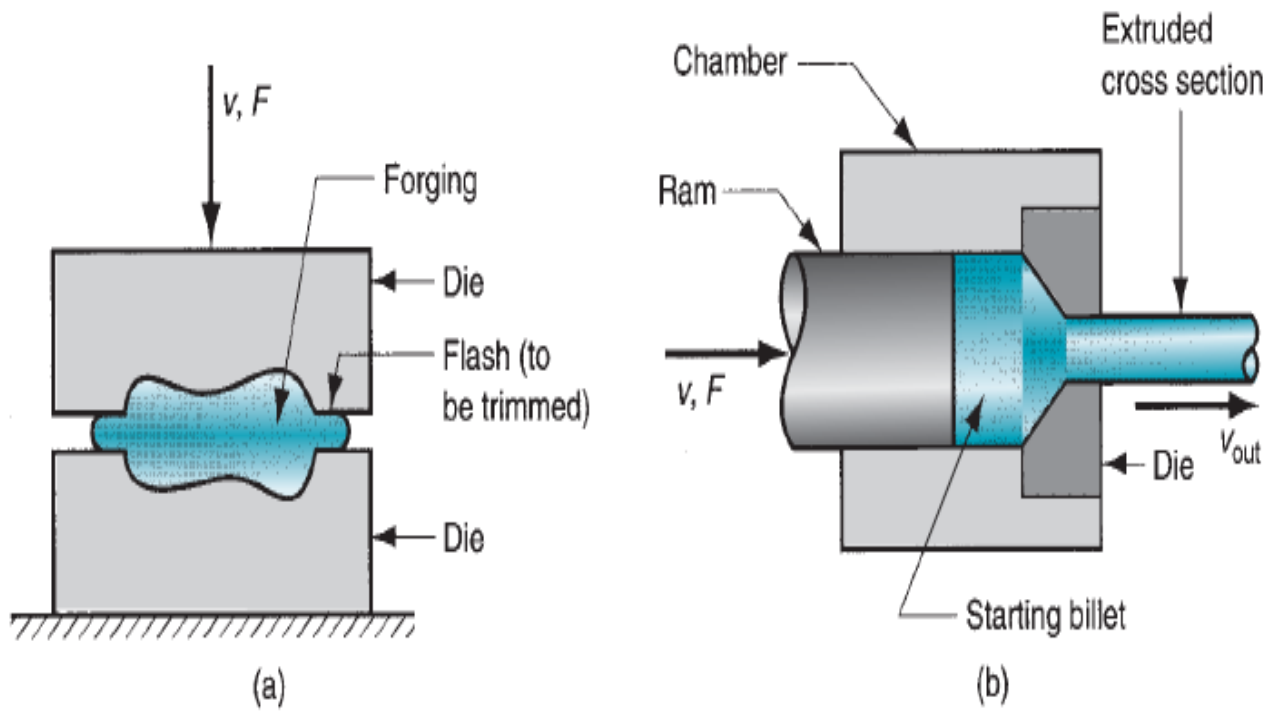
Deformation Processes; (a) forging, (b) extrusion
